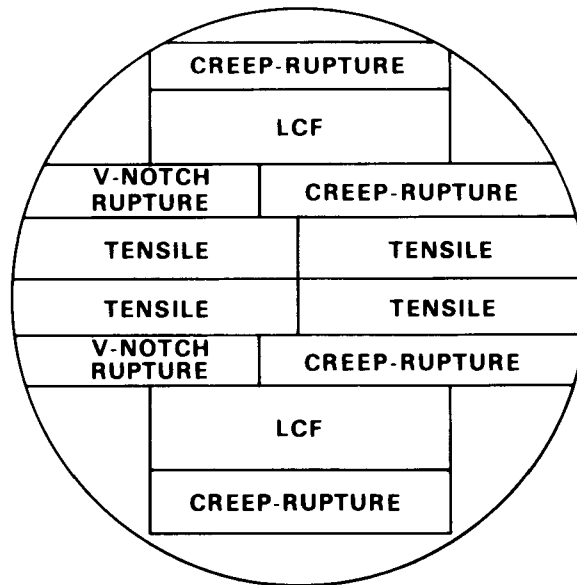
Diagram for Test Specimens Machined from Preform and Wheel FD 79231A
